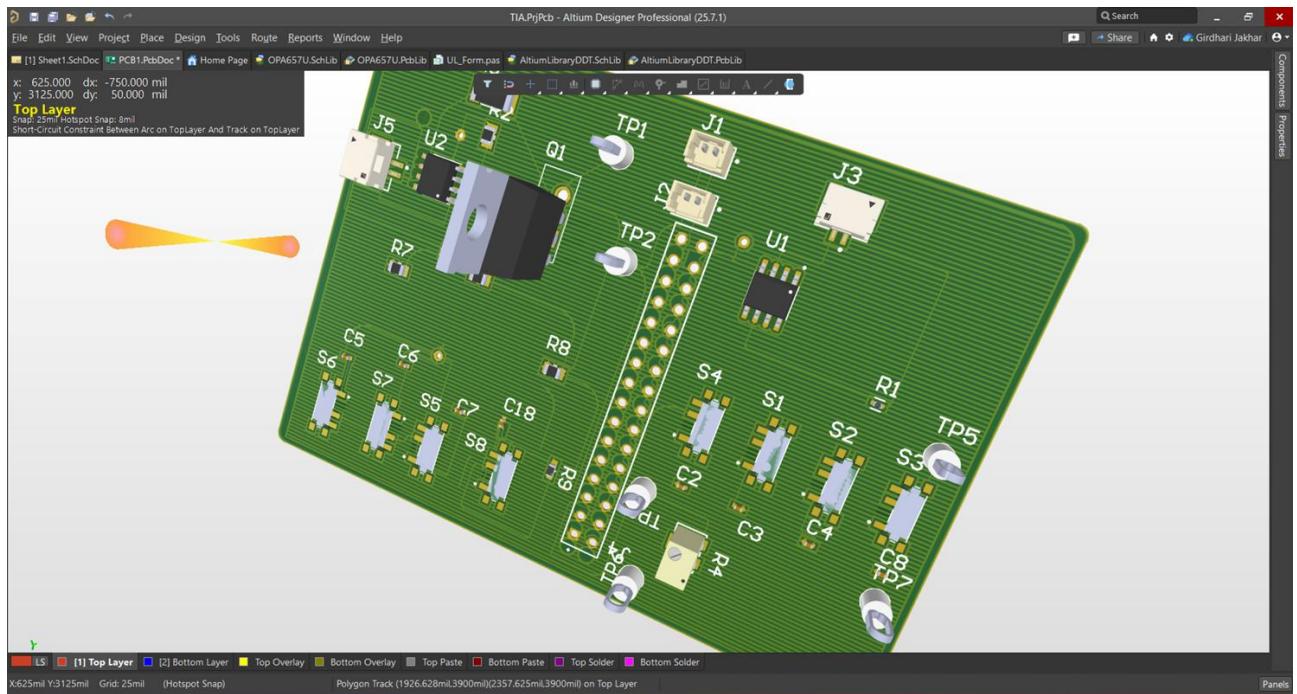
3D top view of the assembled PCB showing ICs, capacitors, connectors, and test points.
